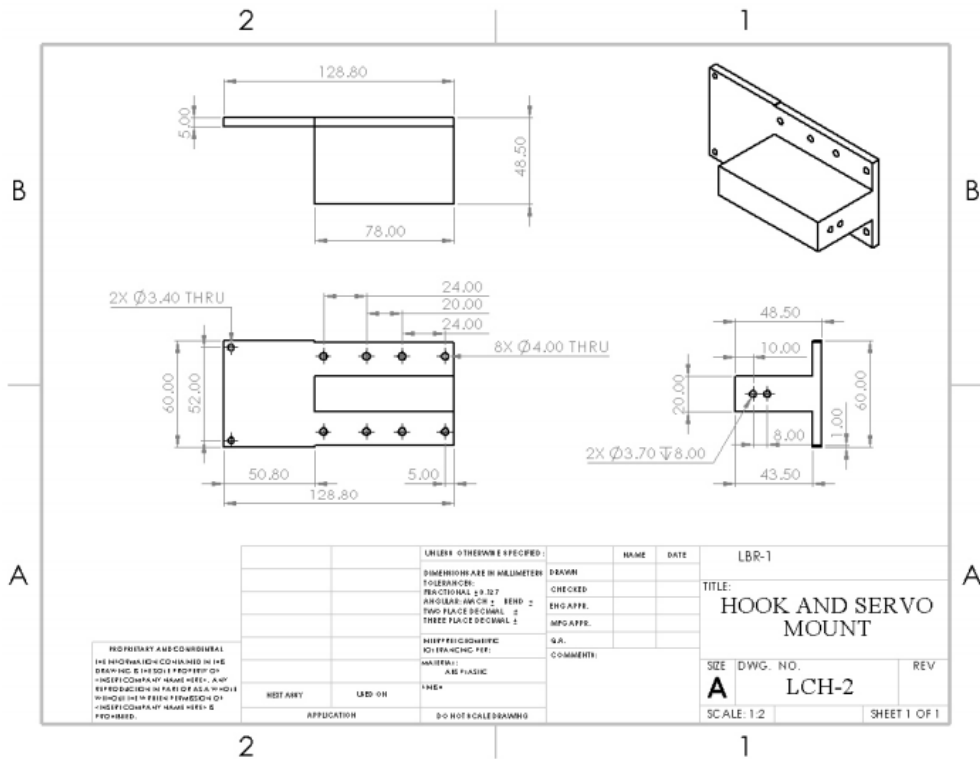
Part drawing of the hook and servo mount for the dual hook assembly.
